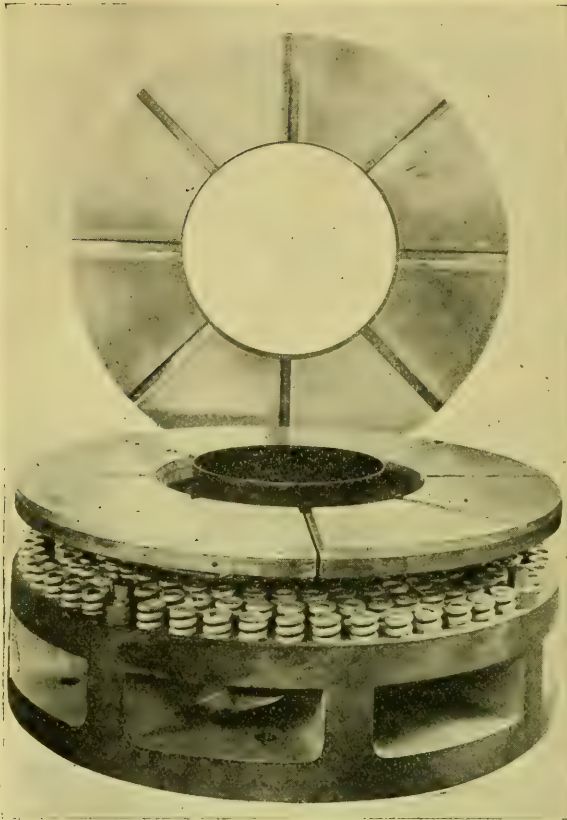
Spring-supported Thrust Bearing, Showing Rubbing Surface of Rotating Ring; Stationary Ring with Sawcut is Raised to Show Arrangement of Springs.
